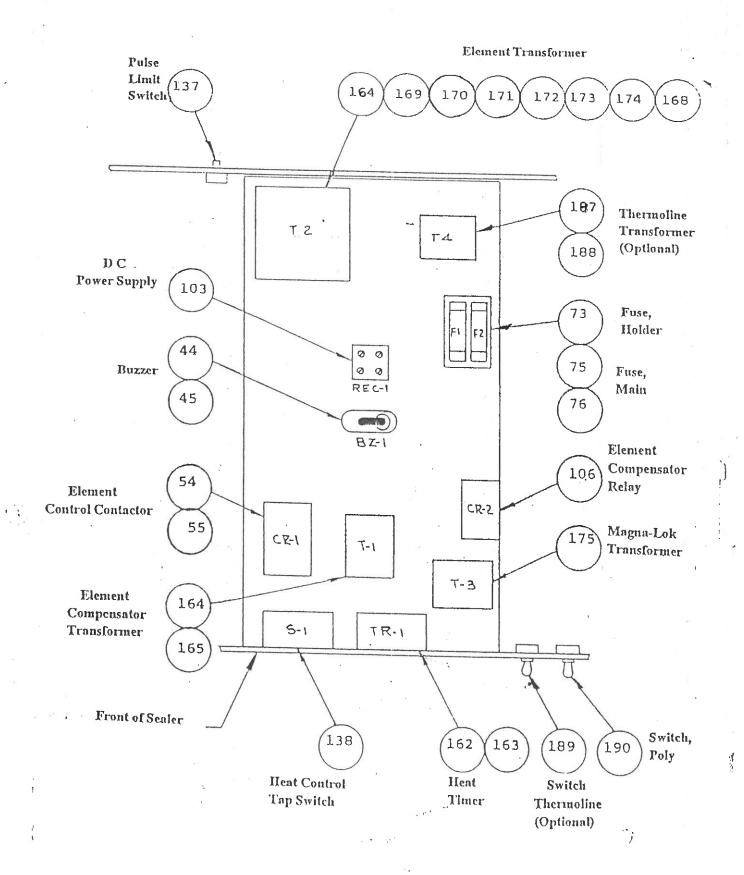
Parts Location, Electrical Chassis Model 6300 Series
